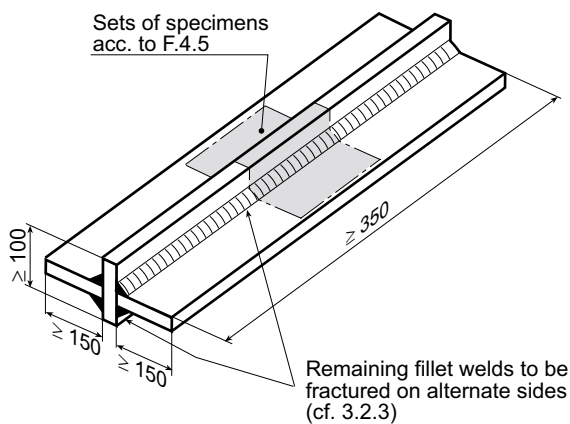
Double T-joint (cruciform) test piece for manual and semi-mechanized welding processes
